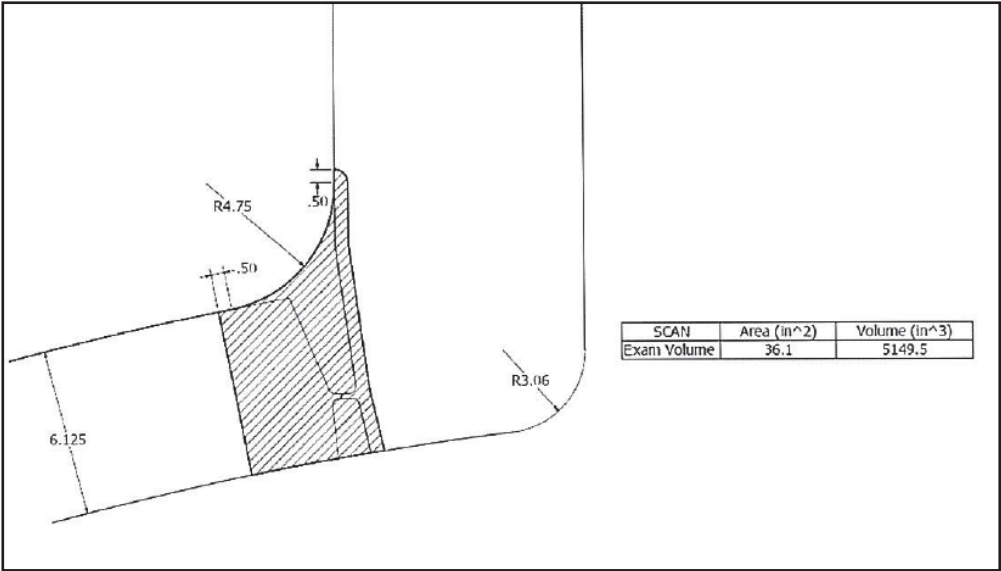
Weld N3C-NV, Calculated Full Volume
